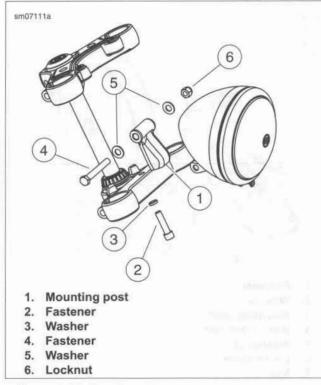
Headlamp Mount: XL 1200V/C/CP/CA/CB
